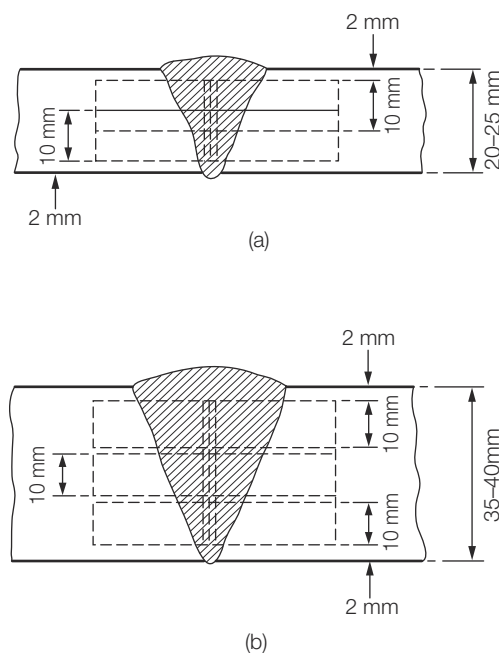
Position of Charpy V-notch impact tests for one-side automatic welding
